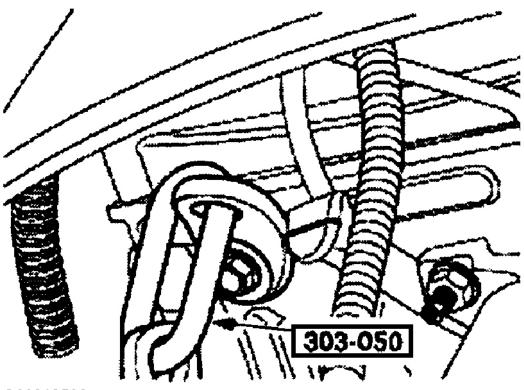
Tapping Hole In RH Cylinder Head For Lifting Courtesy of FORD MOTOR CO.
